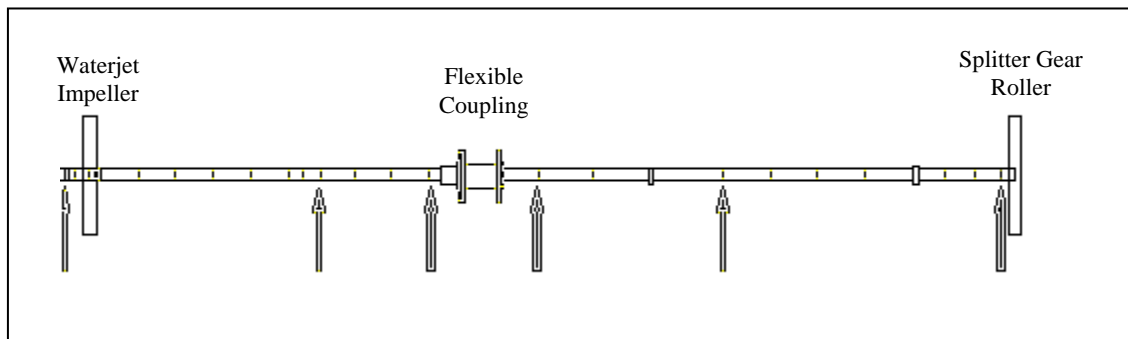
Inboard Waterjet (Boost) Drive Shaft Finite Element Model Clutch Disengaged
